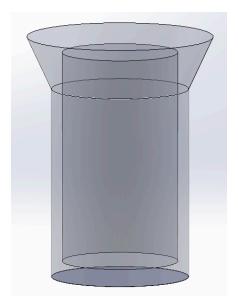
CAD mockup of proposed capsules to contain the magnets, including the flared end.
